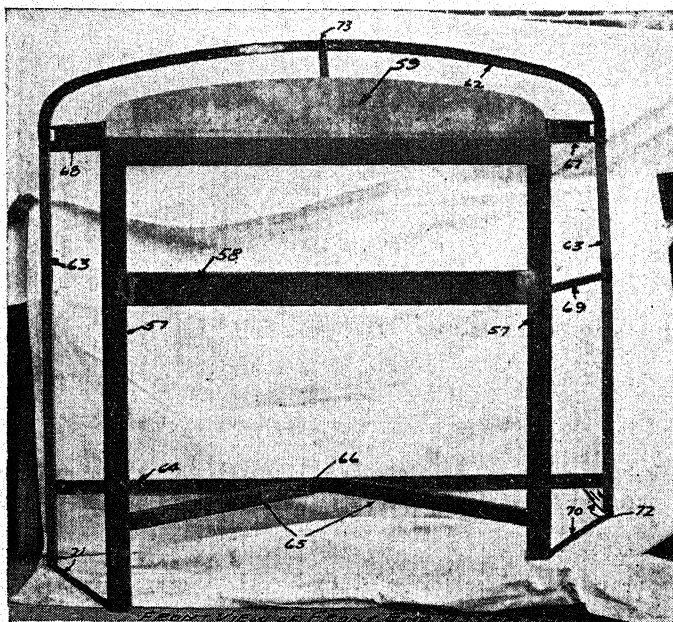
Arc welded body—front view of front end frame assembly.
